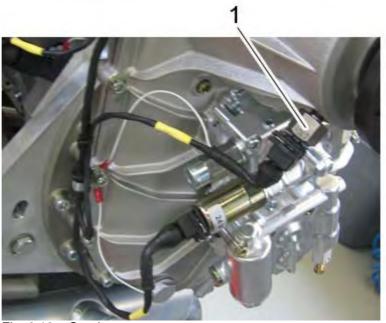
Gearbox temperature sensor 1 Gearbox temperature sensor
